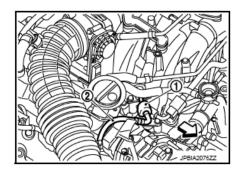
Locating Quick Connector Cap And Fuel Feed Hose Courtesy of NISSAN NORTH AMERICA, INC.
